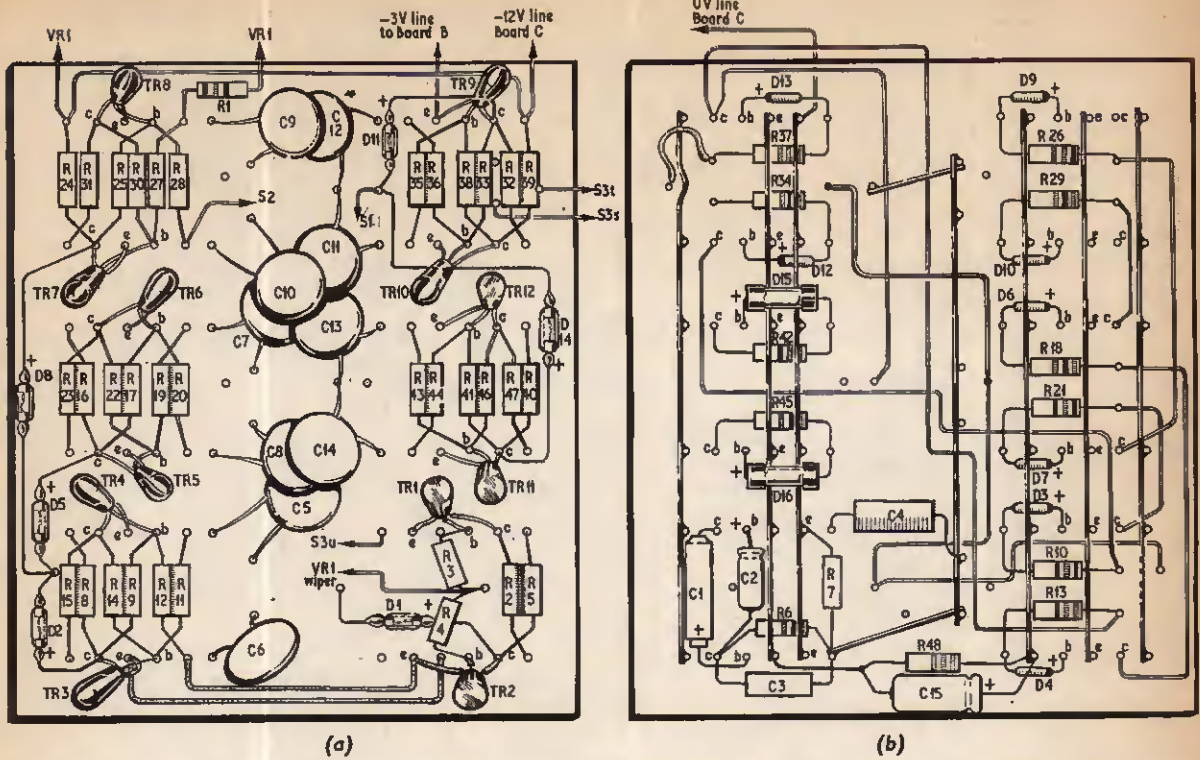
Component layout and wiring for clock pulse generator and bistable board "A". (a) topside view; (b) underside view
